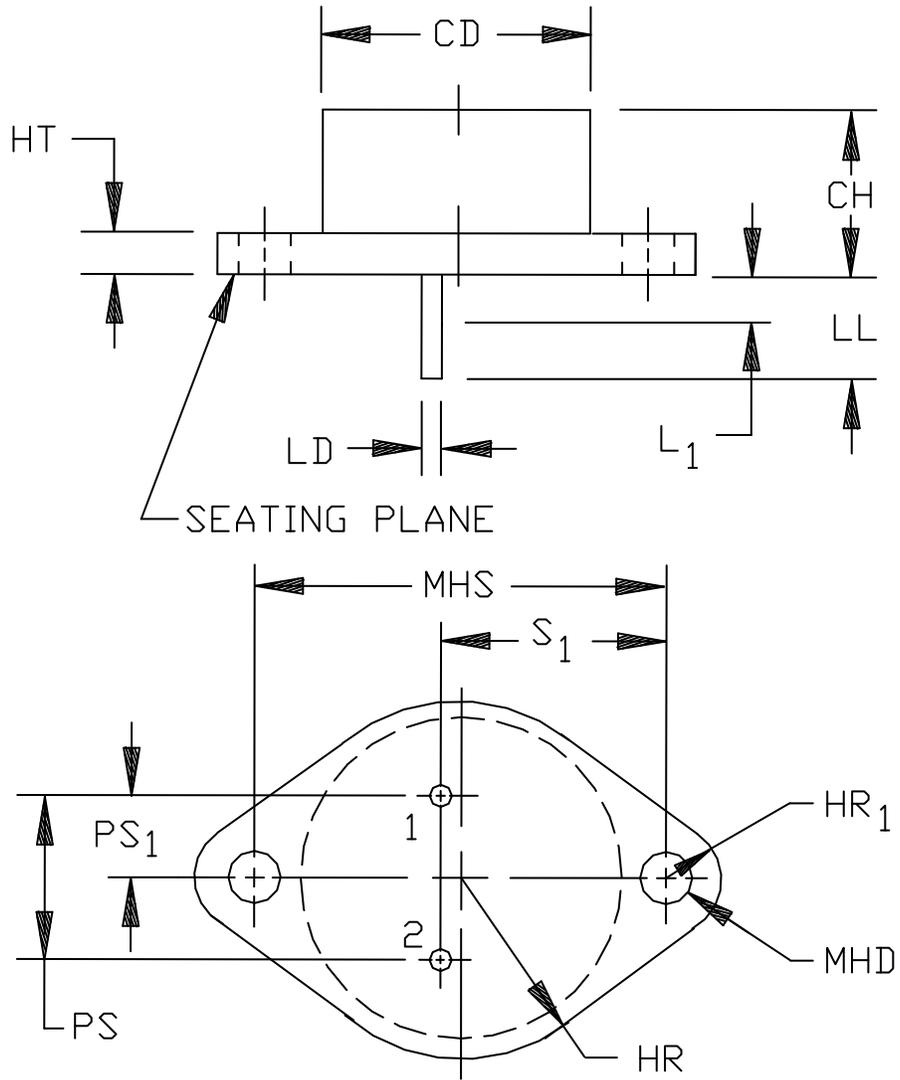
Physical dimensions (TO-204AA, formerly TO-3)
